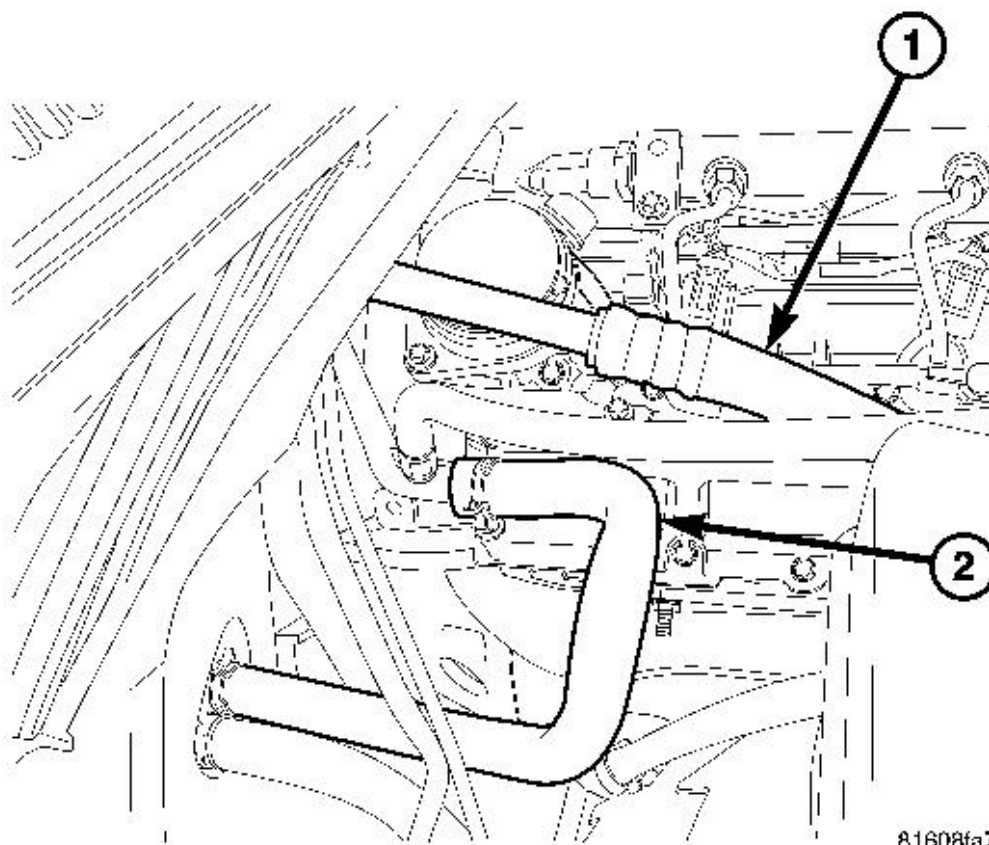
Fuel Tank Supply & Rear Engine Wiring Harness
